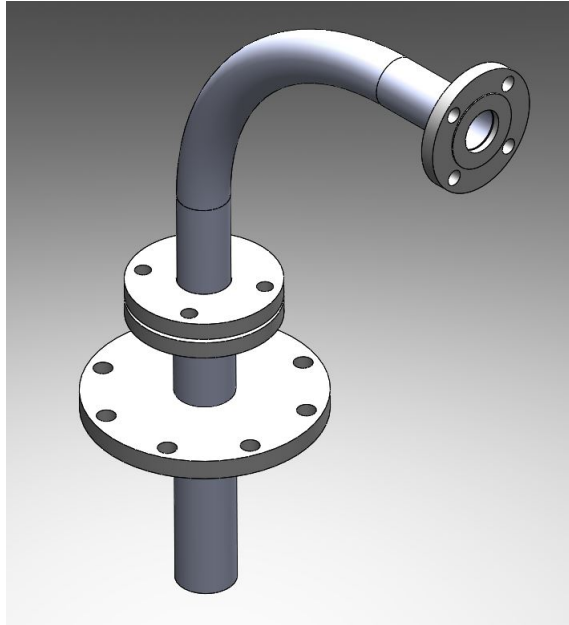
Rendering of the modified steam outlet and long elbow assembly.
